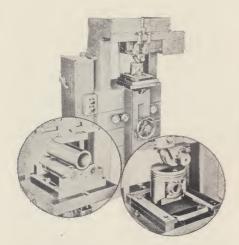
Hydraulic marking machine, Inset (left) shows roll marking with flat die of work supported in cradle; other inset (right) shows marking of piston head with roll die.
